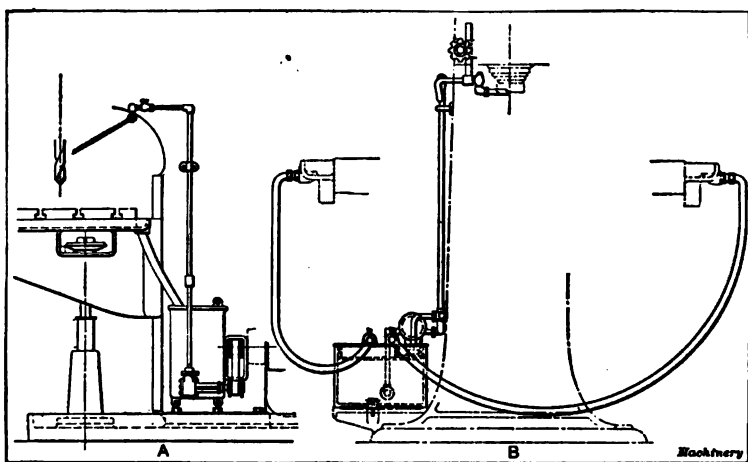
A, Lubricating System for Drilling Machine; B, Supply and Return System of Vertical Milling Machine
